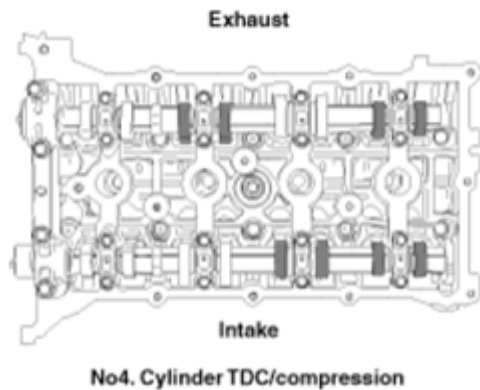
Identifying Intake & Exhaust Valves (No. 4 Cylinder At TDC)
